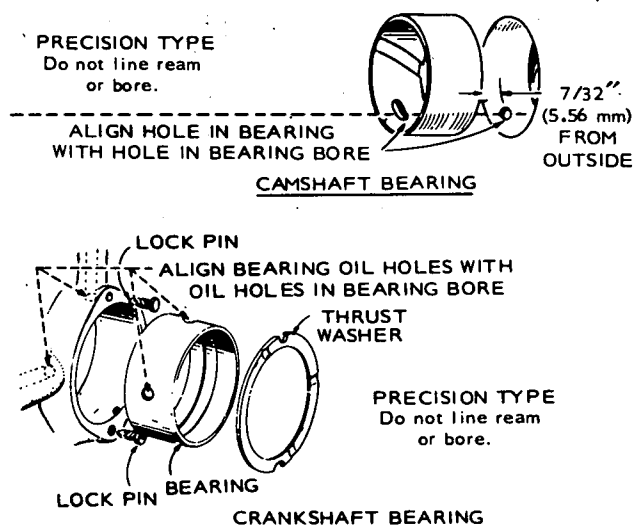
CAMSHAFT AND CRANKSHAFT BEARINGS
